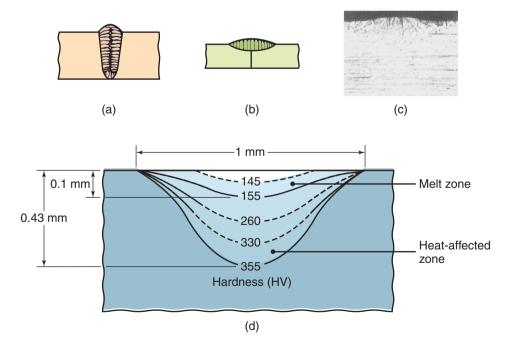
Grain structure in (a) a deep weld and (b) a shallow weld. Note that the grains in the solidified weld metal are perpendicular to their interface with the base metal. (c) Weld bead on a cold-rolled nickel strip produced by a laser beam. (d) Microhardness (HV) profile across a weld bead.
